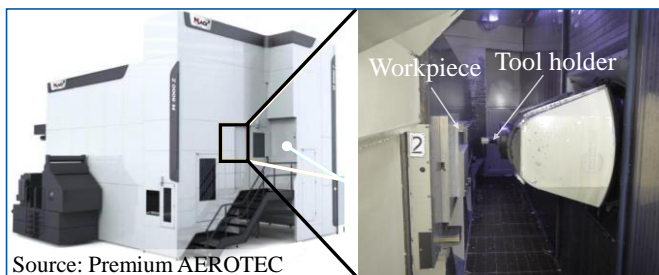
Experimental setup on a machine tool MAG H5000 at Premium AEROTEC Varel, Germany
